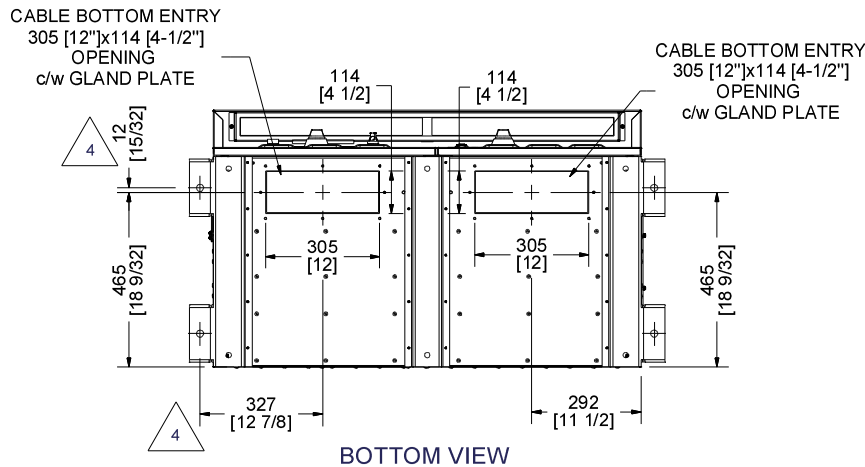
Bottom Gland Plate Dimensions (PVS-50 Model)
